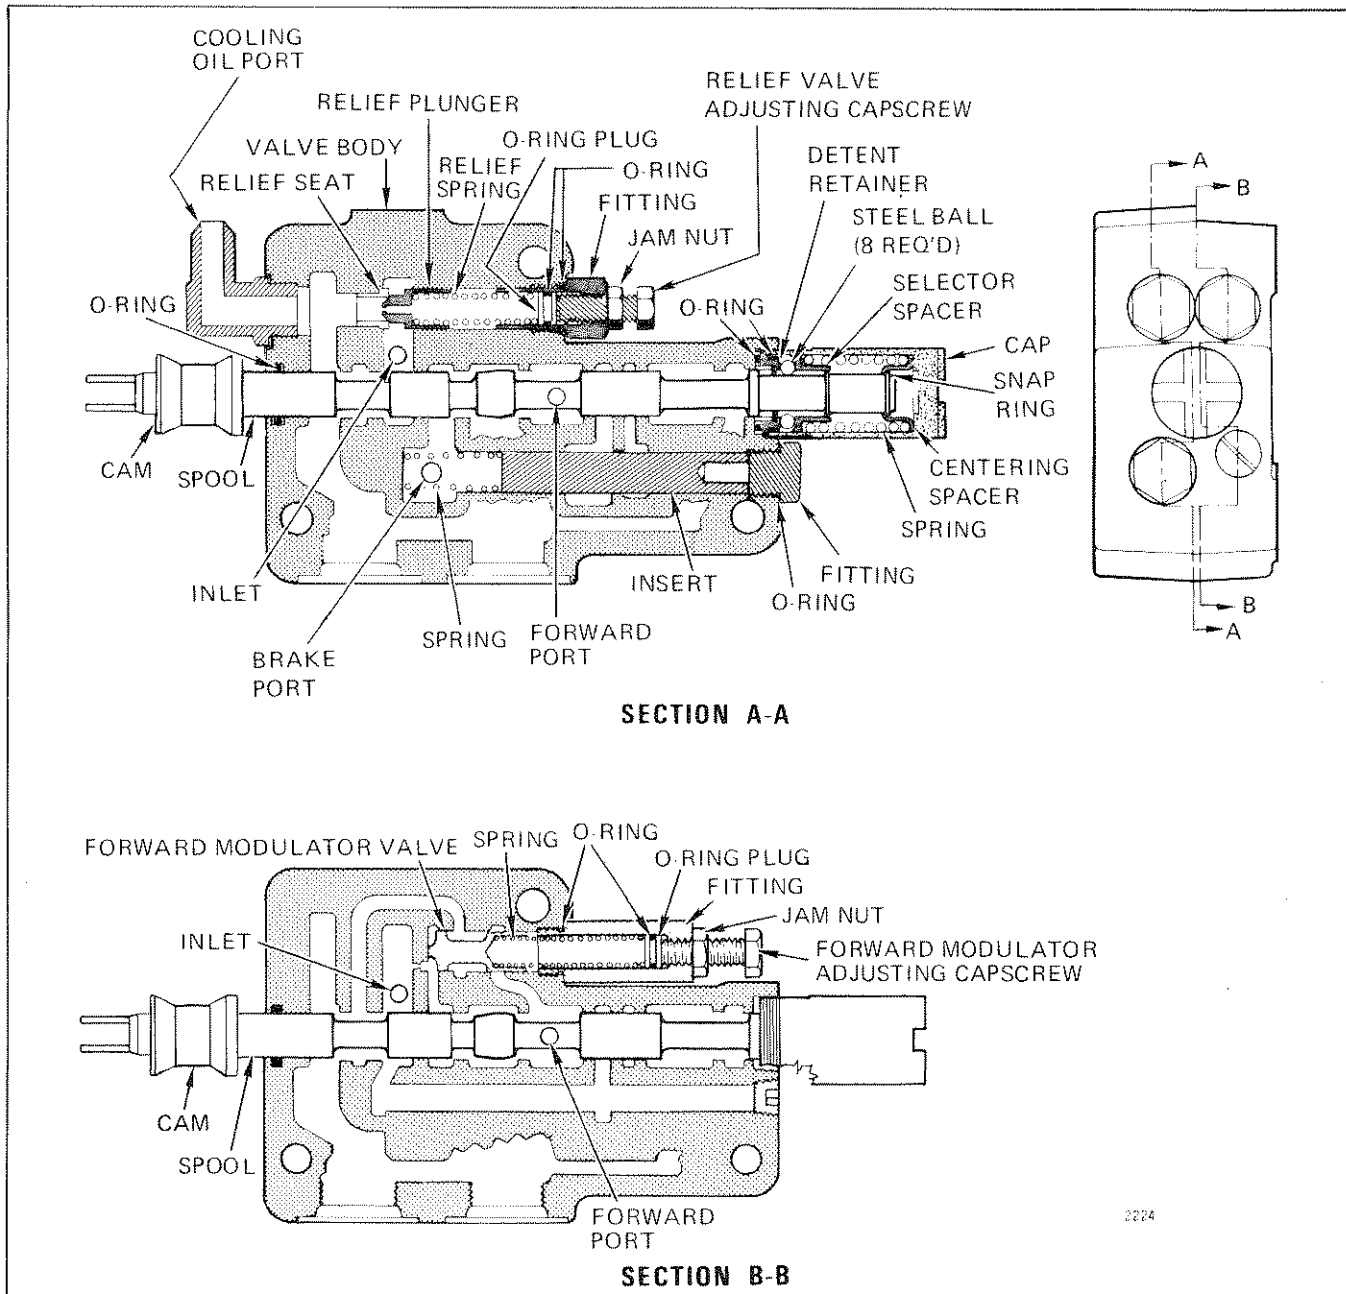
CONTROL VALVE ASSEMBLY FOR POWER-FORWARD ONLY WINCH (PFO)
